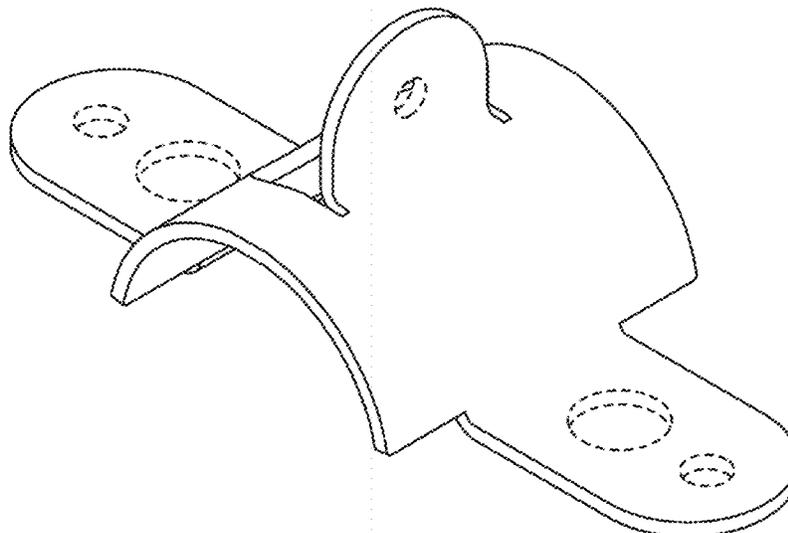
is a top front view of the pipe mounted attachment bracket of FIG. 1;
